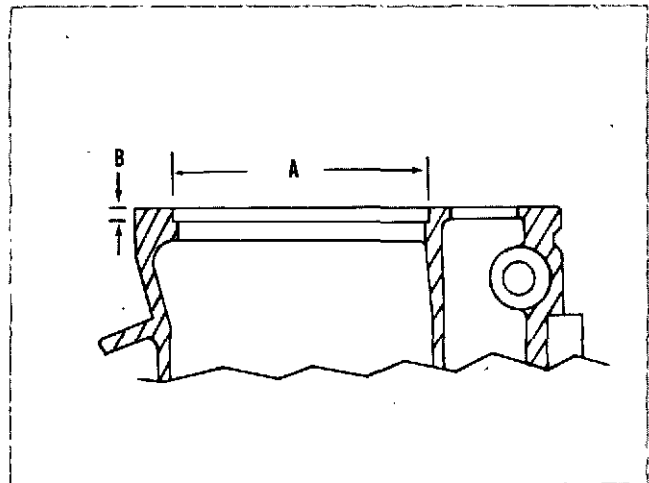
, V414207, Cylinder liner counterbore dimensions
